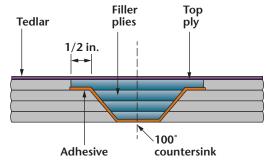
An example of a typical mislocated hole repair using reinforcing plies to fill the hole.
